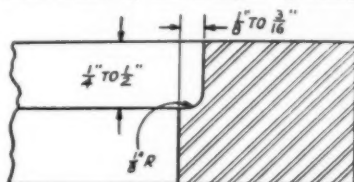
Enlarged section showing method of grooving dies prior to hard-facing.
